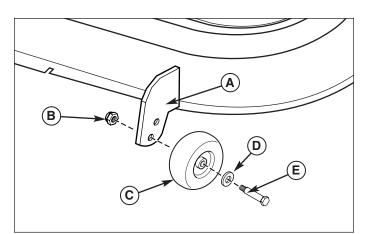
Fixed Bracket Gauge Wheel Adjustment
